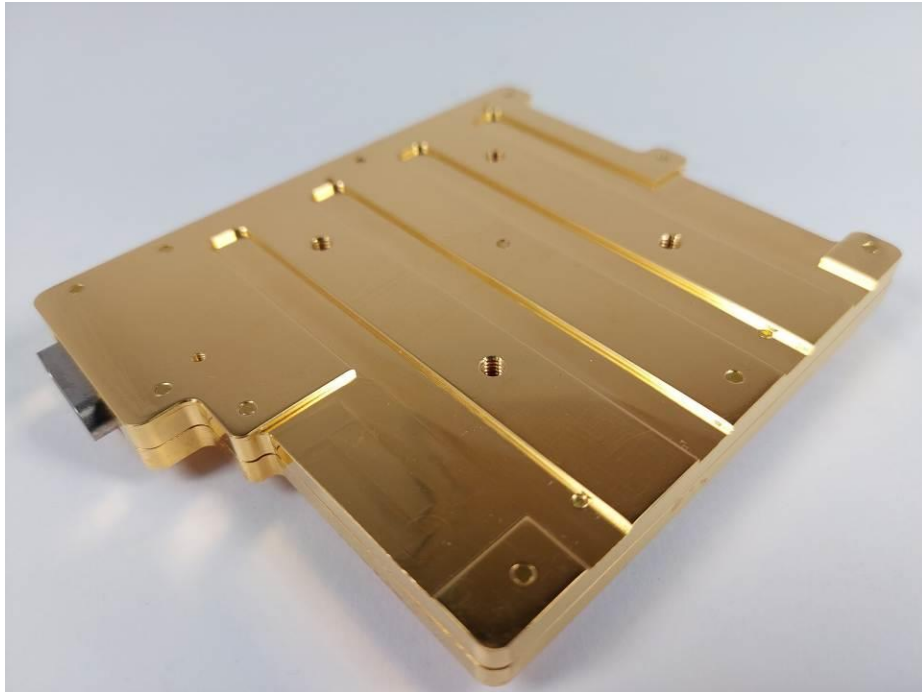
Four threaded M4 mounting holes in grid 40 mm x 40 mm.
